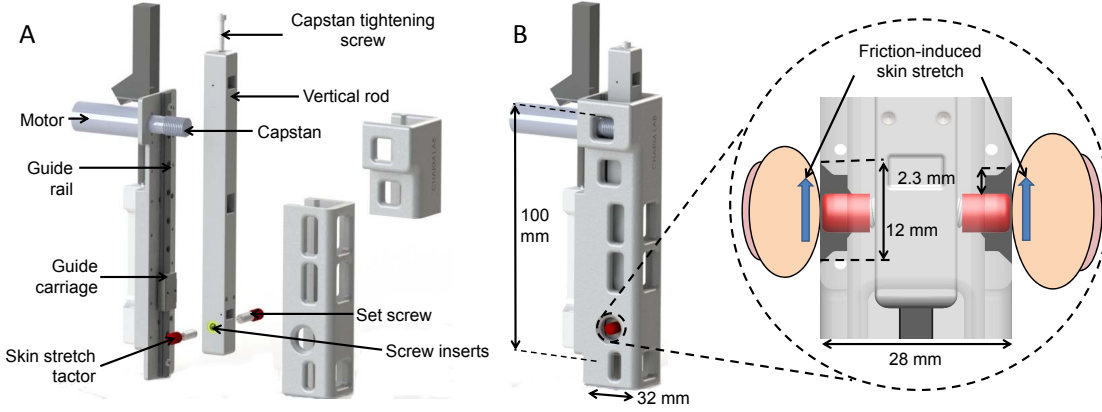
Exploded and assembled view of the Skin Stretch Stylus. A: The device consists of a vertical rod attached to a linear guide carriage, which slides along the linear guide rail. A DC motor actuates the vertical rod through a cable capstan mechanism. Skin stretch tactors are attached to the side of the rod. B: Movement of the tactors stretch the skin of the users fingerpad while the users fingers are locally grounded on the outer aperture. The skin stretch tactor movement was software-limited to -2.3 mm in order to prevent the tactor from hitting the sides of the aperture.
